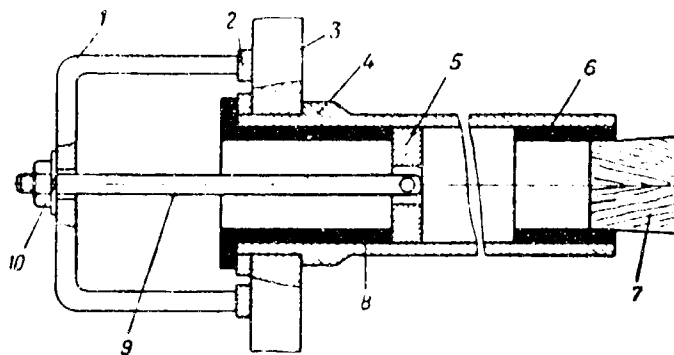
Device for Pressing Out the Deadwood Sleeves (Bushings) with Forming Flange on a Joint:
